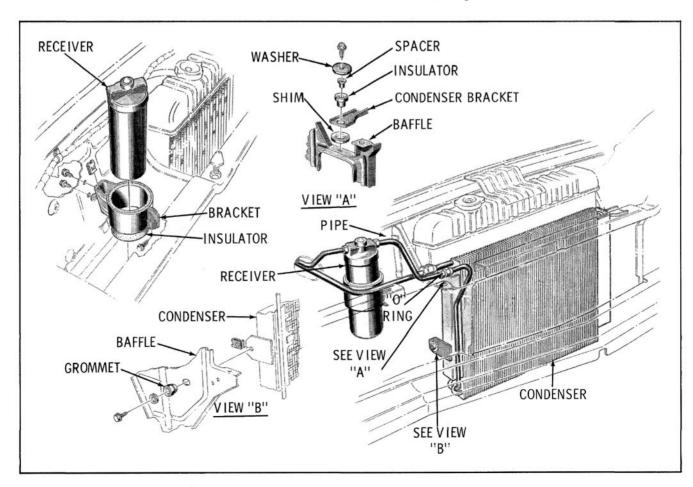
Condenser and Receiver Attachment (33 - 34 - 35 - 36 - 38 & 39 Series)
